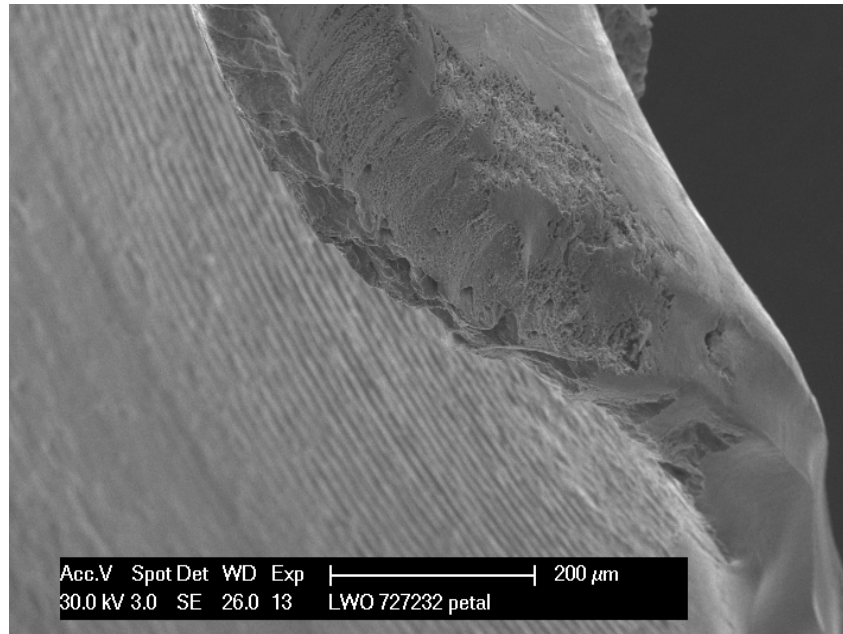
Fractographic shows the eroded surface on the bottom edge of the right most petal on the dynamically burst SSBD. Overall view shown in Figure 13 (top right).
